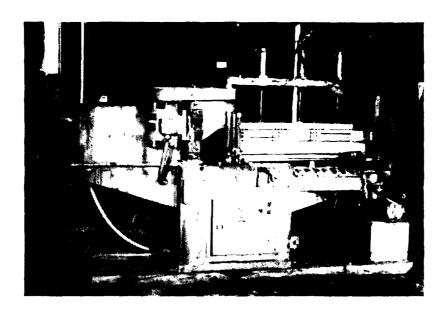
Skid-Mounted 48-inch Twin Spindle Profile Shaper.
